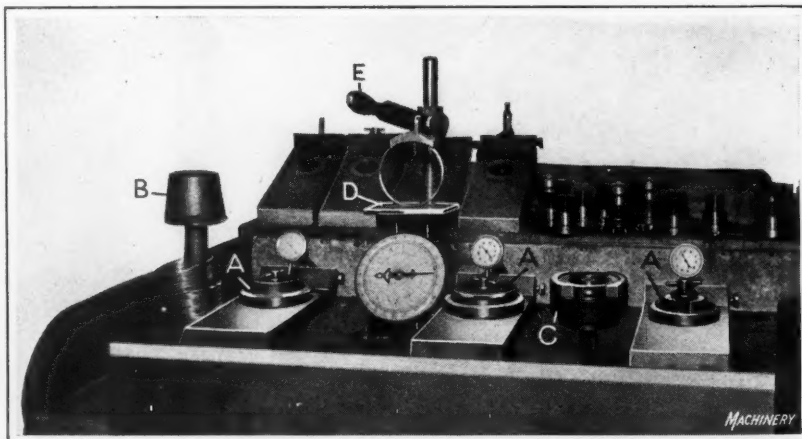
Gages and Testing Devices used for inspecting the Finished Rings
